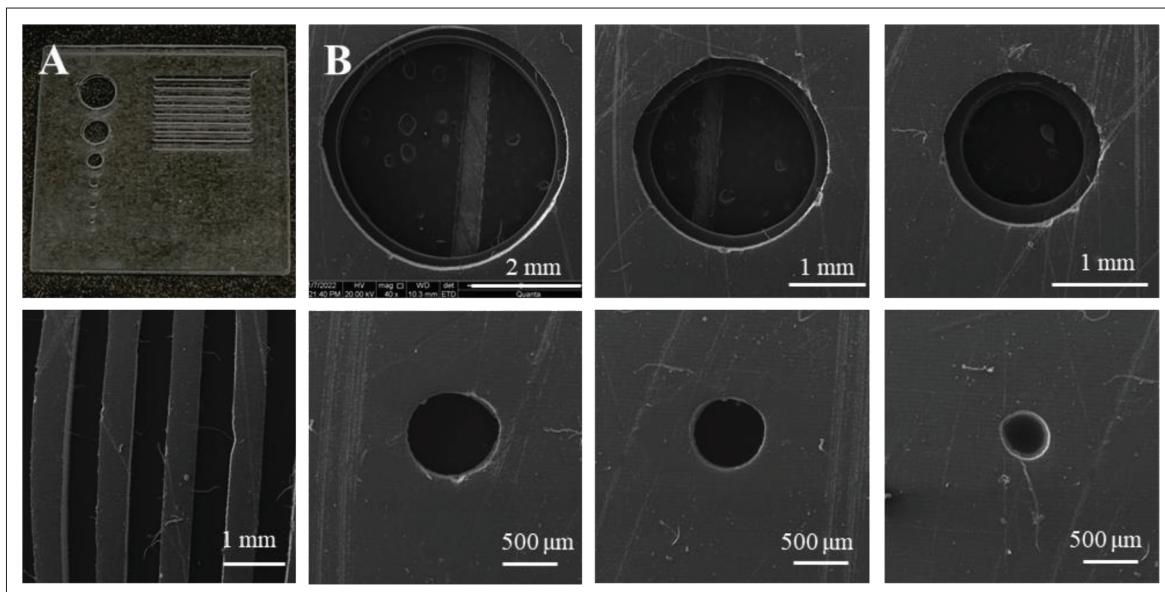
Forming dimension accuracy experiment of 3D printing. (A) Printed accuracy sheet, (B) SEM of accuracy sheet.
